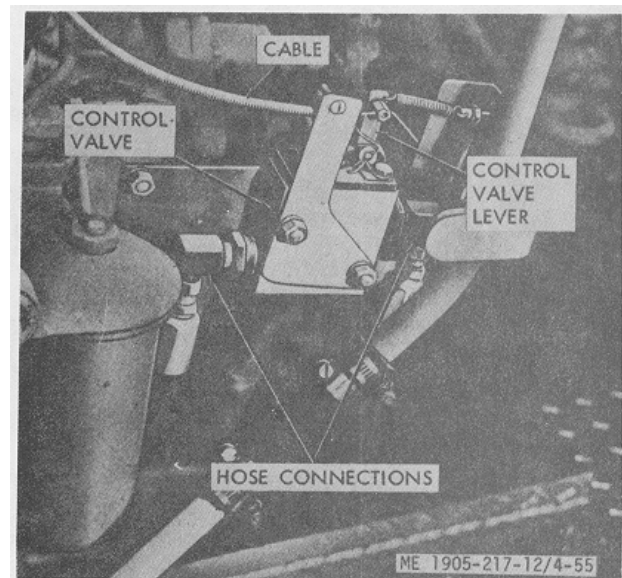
Hydraulic starting control valve, hull numbers 8520 thru 8539.
